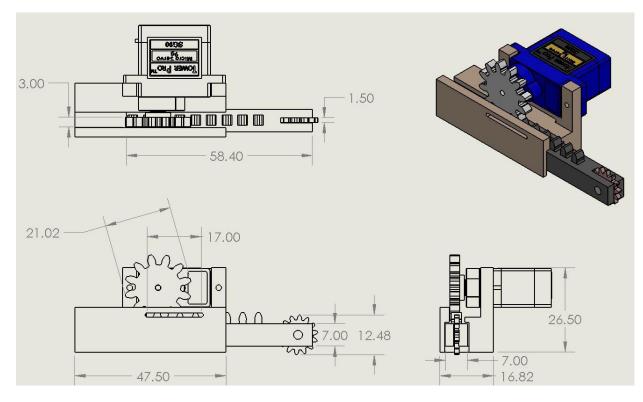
Technical Drawing of SG90 linear actuator (All the dimensions mentioned are in millimeters (mm))
